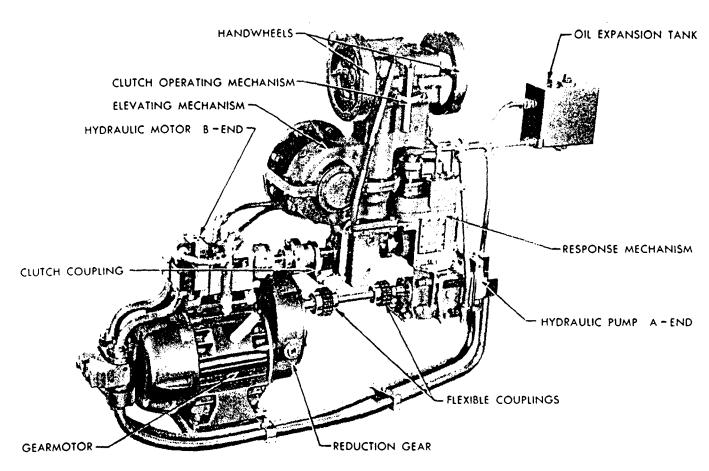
Elevating mechanism and hydraulic system, 6-inch gun barbette carriage M1.
